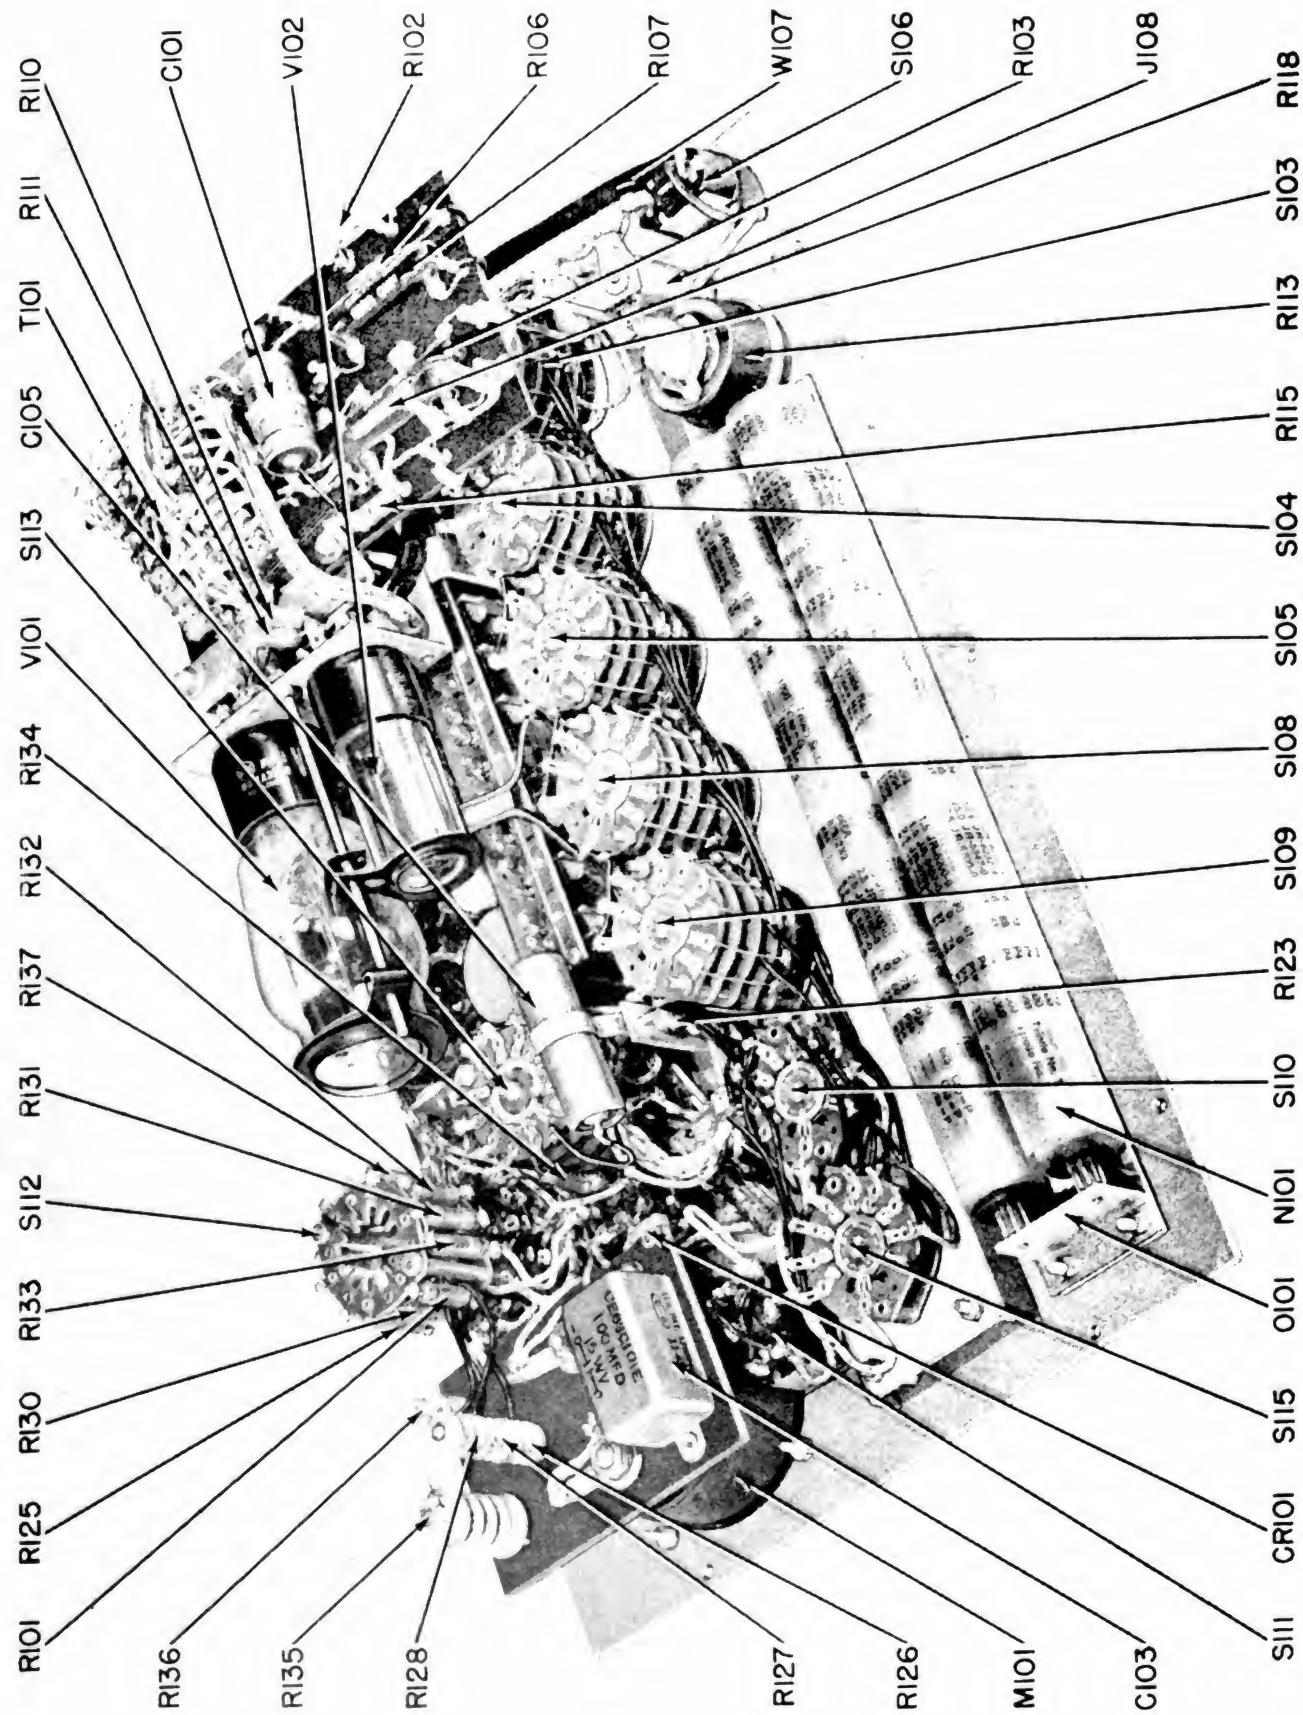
Internal View of Tube Tester TV-3/U (Front Left Oblique)
